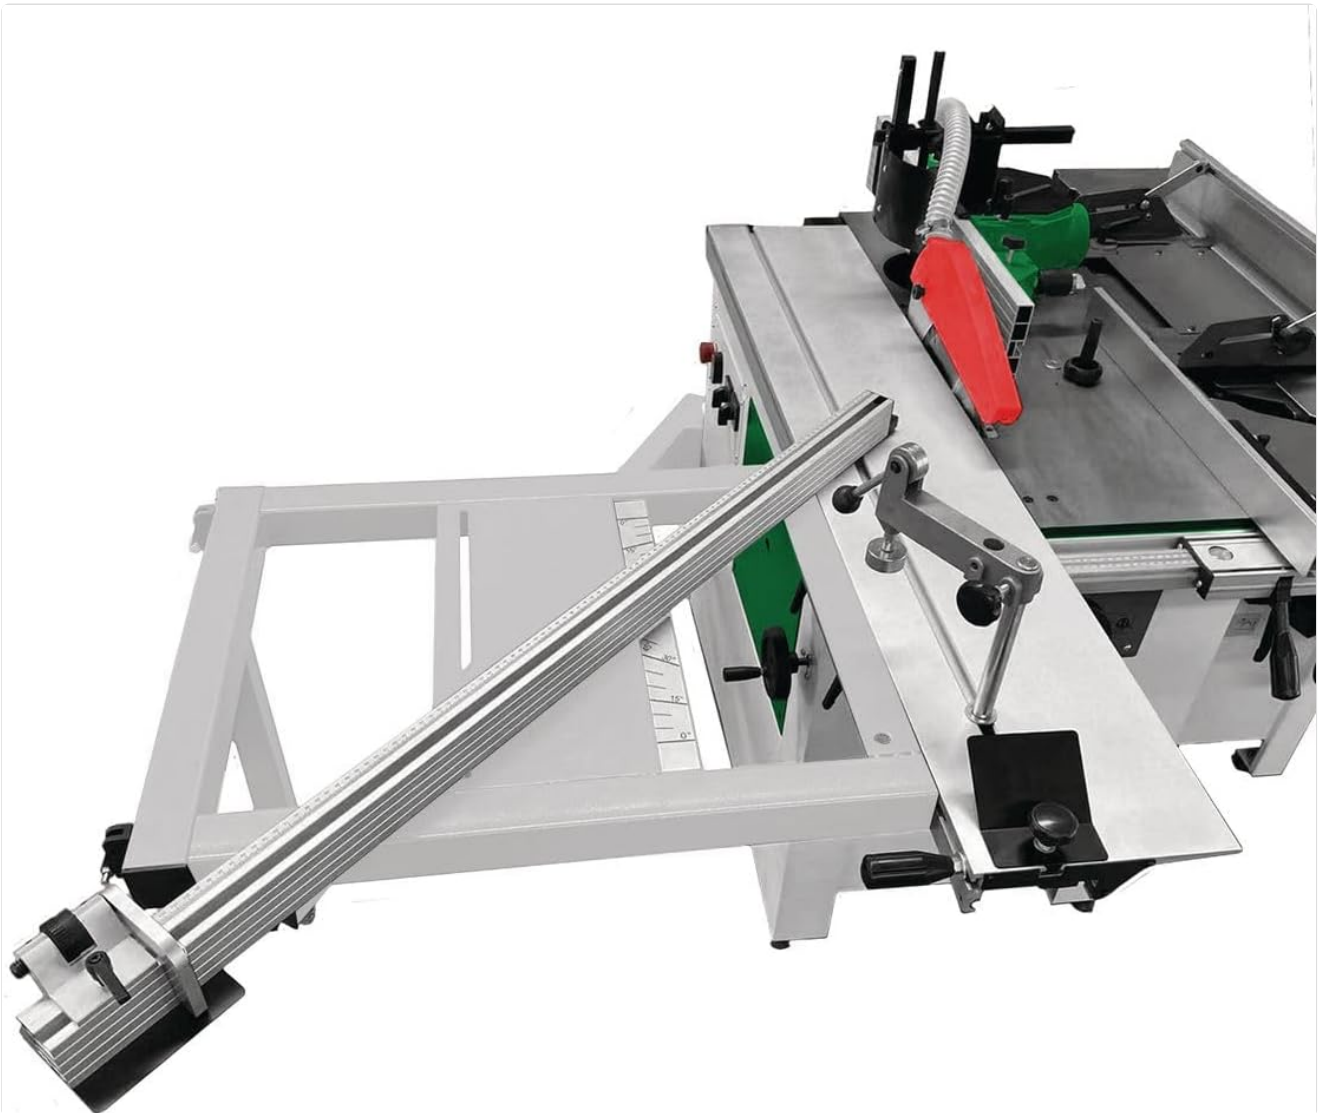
The machine configured with the sliding table saw. This view highlights the extended support for larger workpieces during cutting operations.
